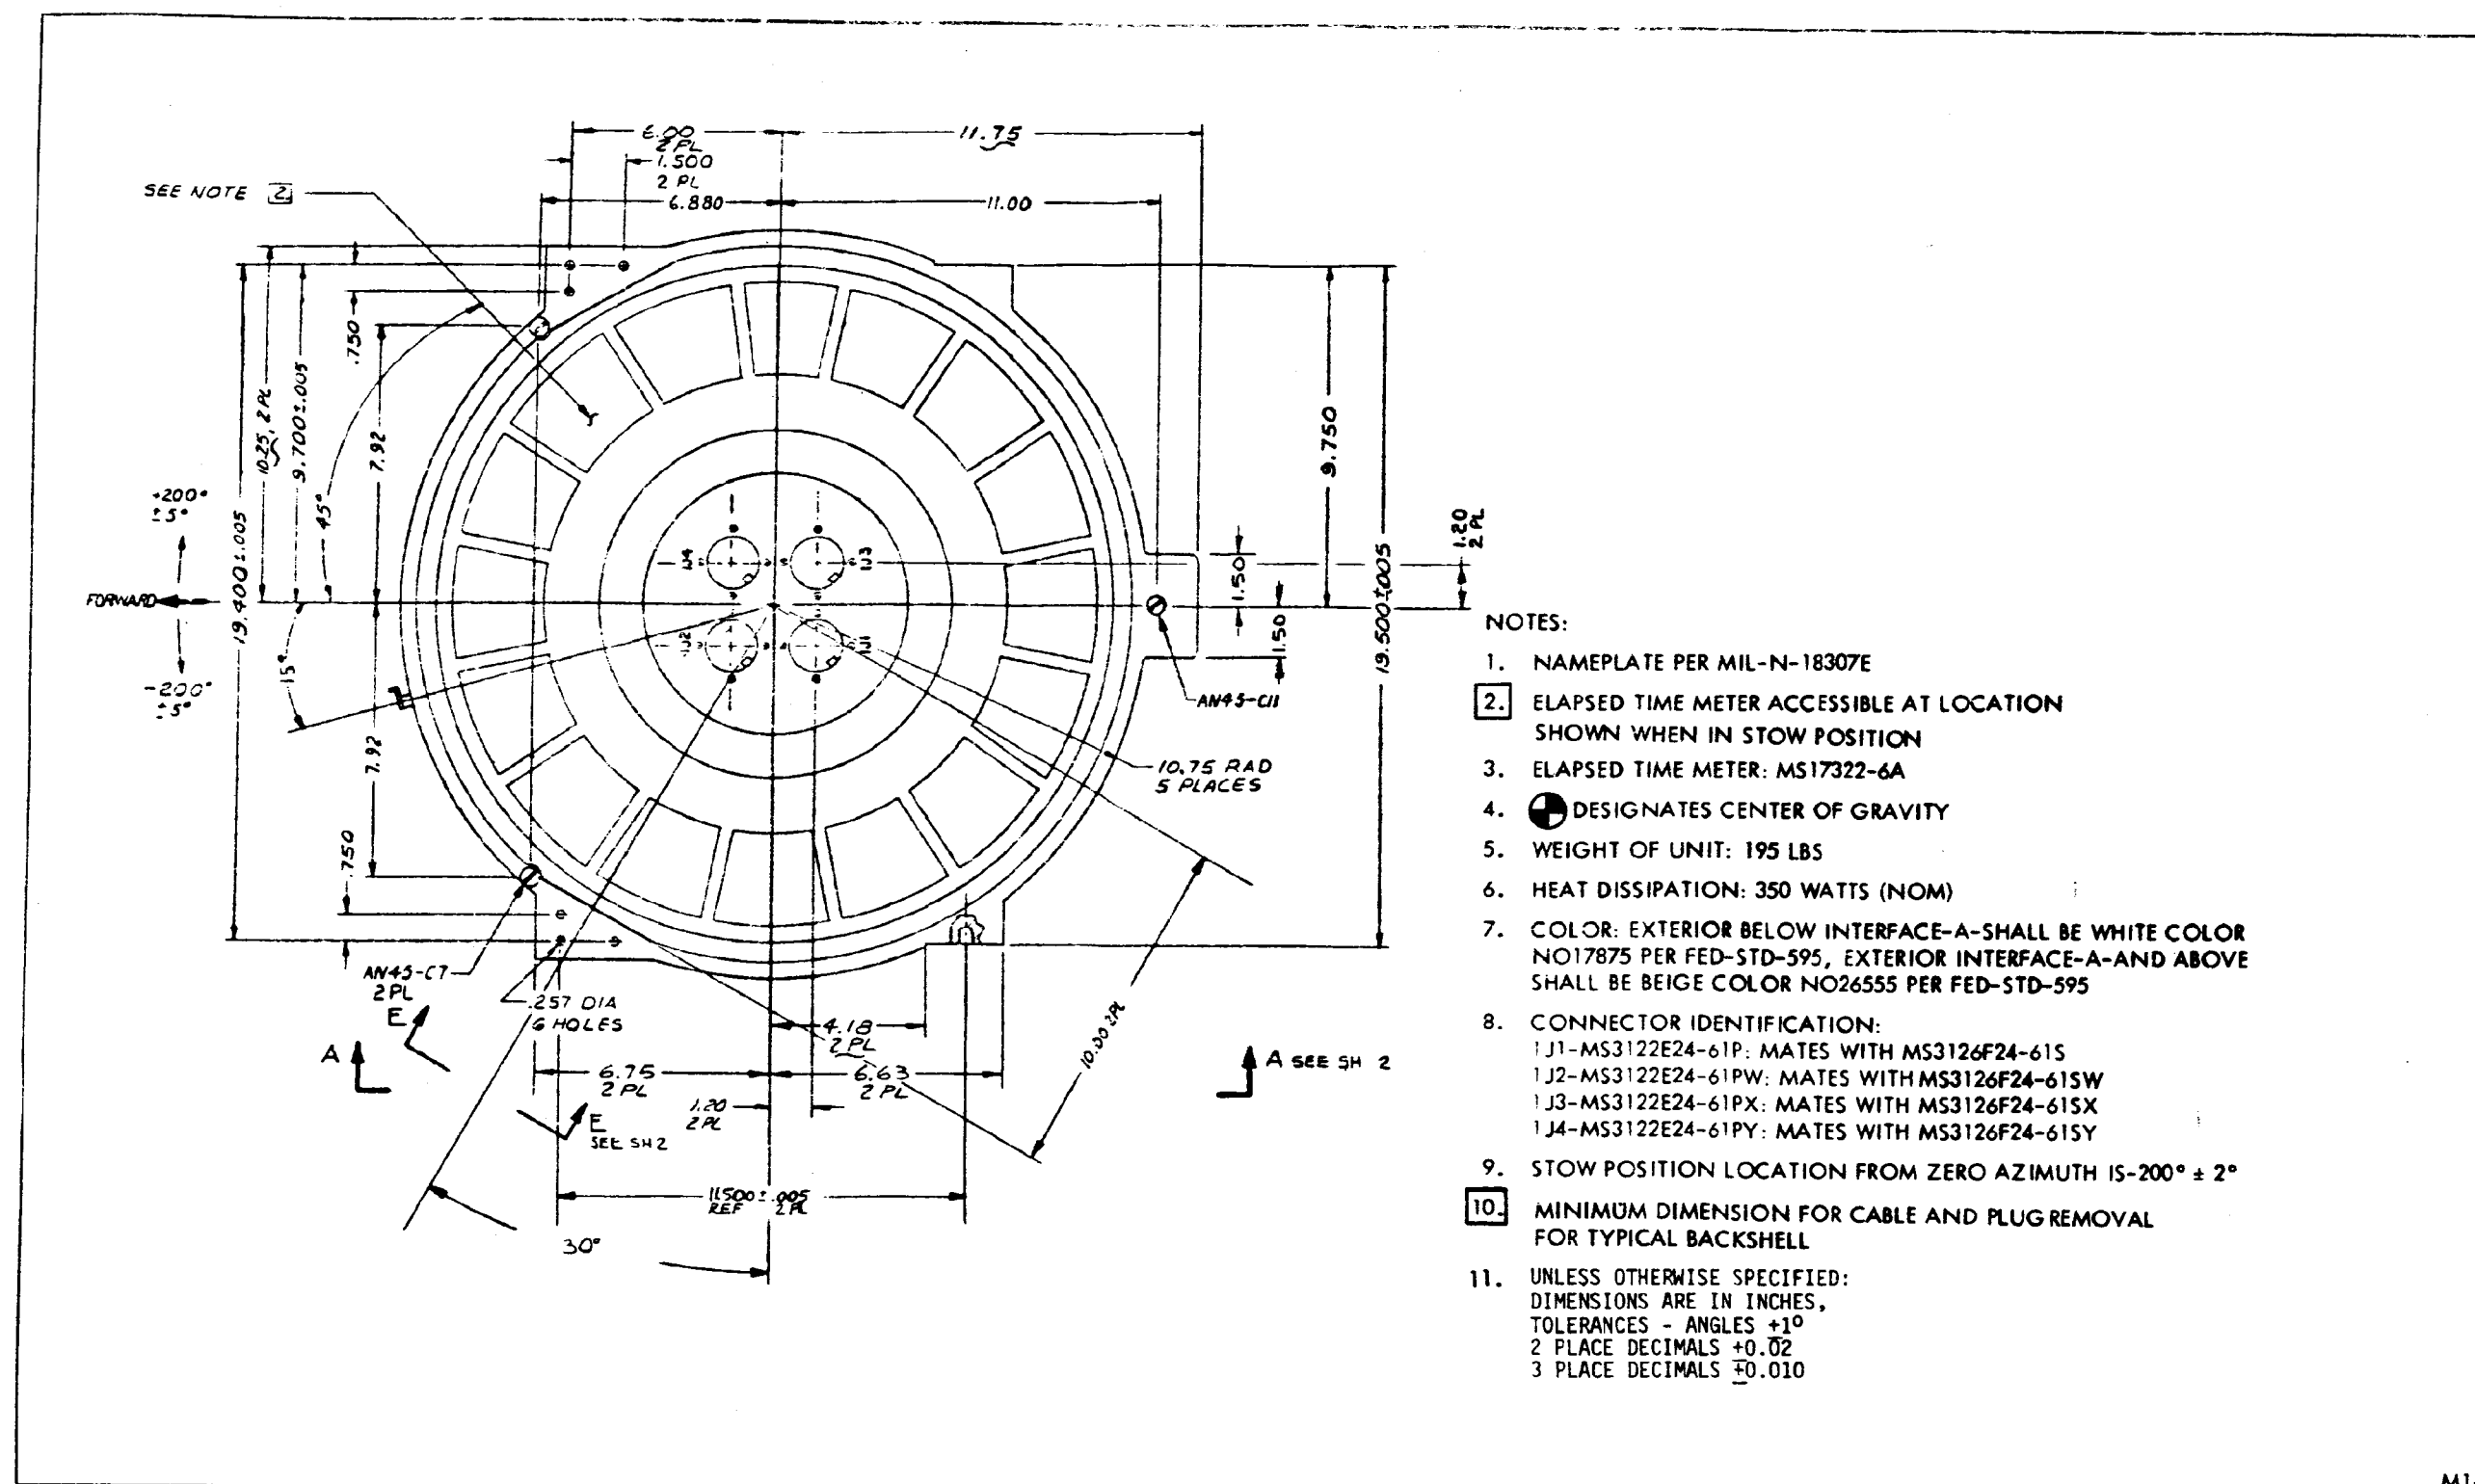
Receiver converter, outline drawing. (sheet 1 of 5)
